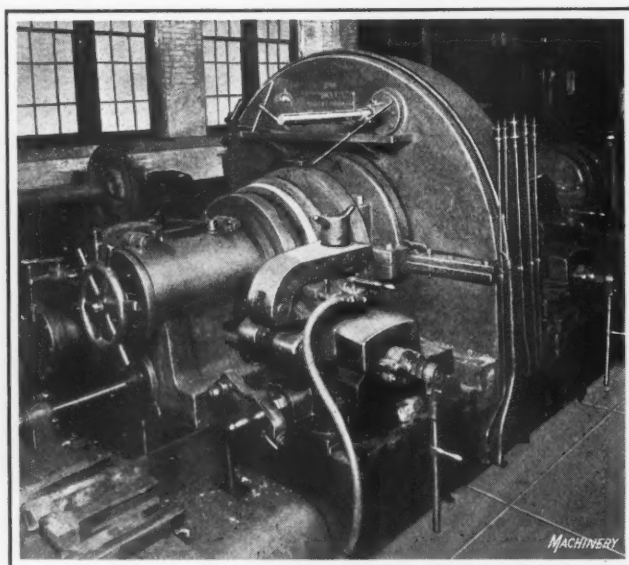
Car-wheel Lathe used for re-turning Treads of Wheels while in Place on their Axle
